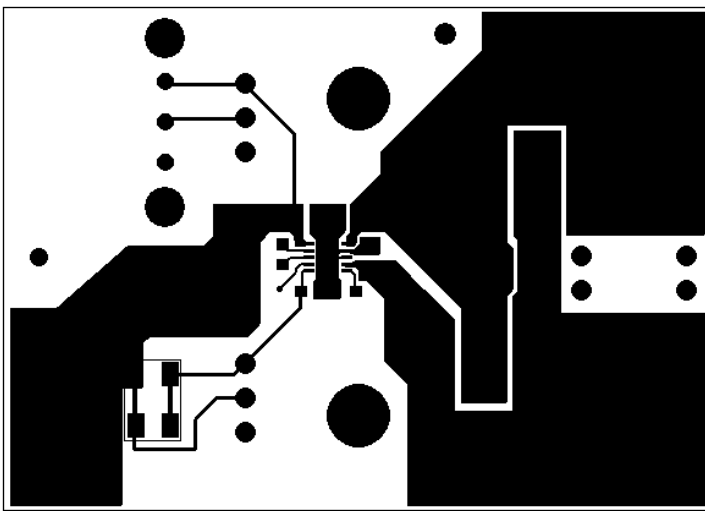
SP6685EB PC LAYOUT TOP SIDE
